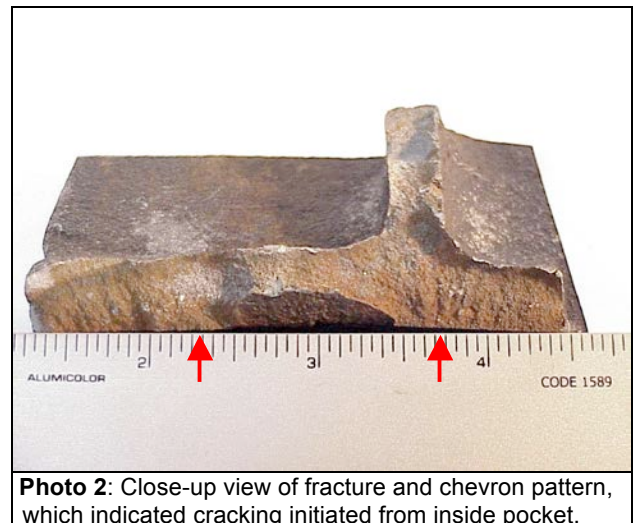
Close-up view of fracture and chevron pattern, which indicated cracking initiated from inside pocket.
